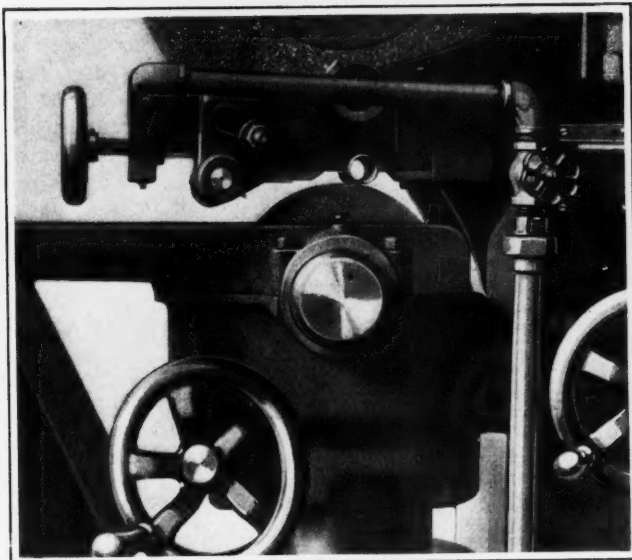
Work being fed by Driving Wheel through Guide Blocks
